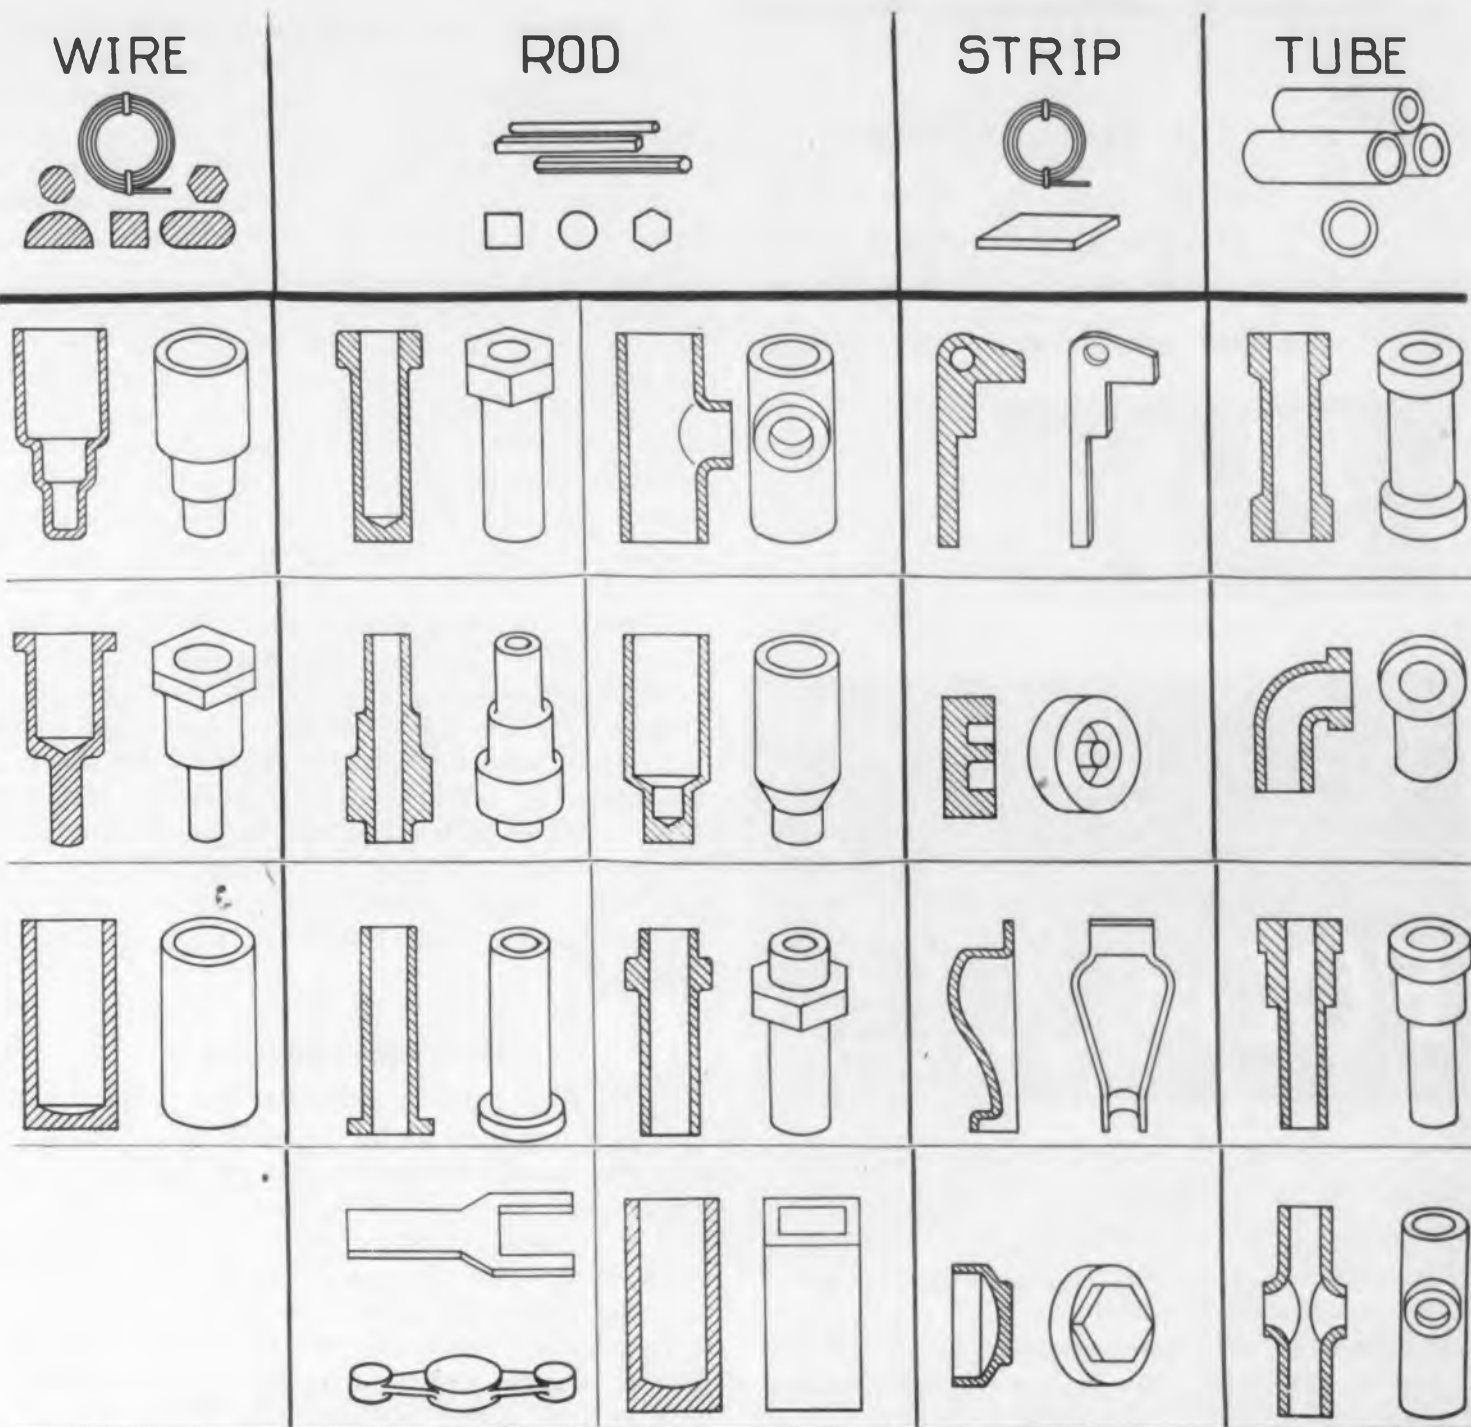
Examples of shapes that are readily fabricated by metal plastic flow (cold extrusion). A selection of wire, rod, strip, or tube stock should be made, depending upon the final shape desired.
